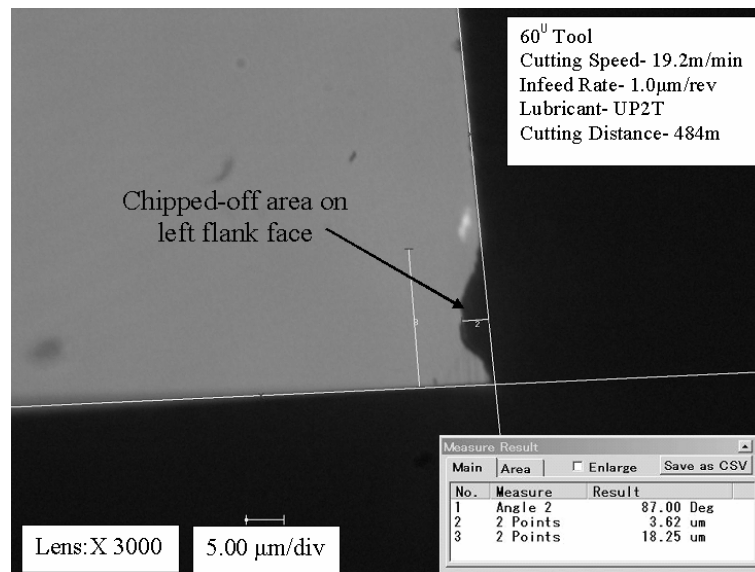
(b): Keyence image of chipped-off area on left flank face of a 60° tool (tool-8), after 484m cutting distance
